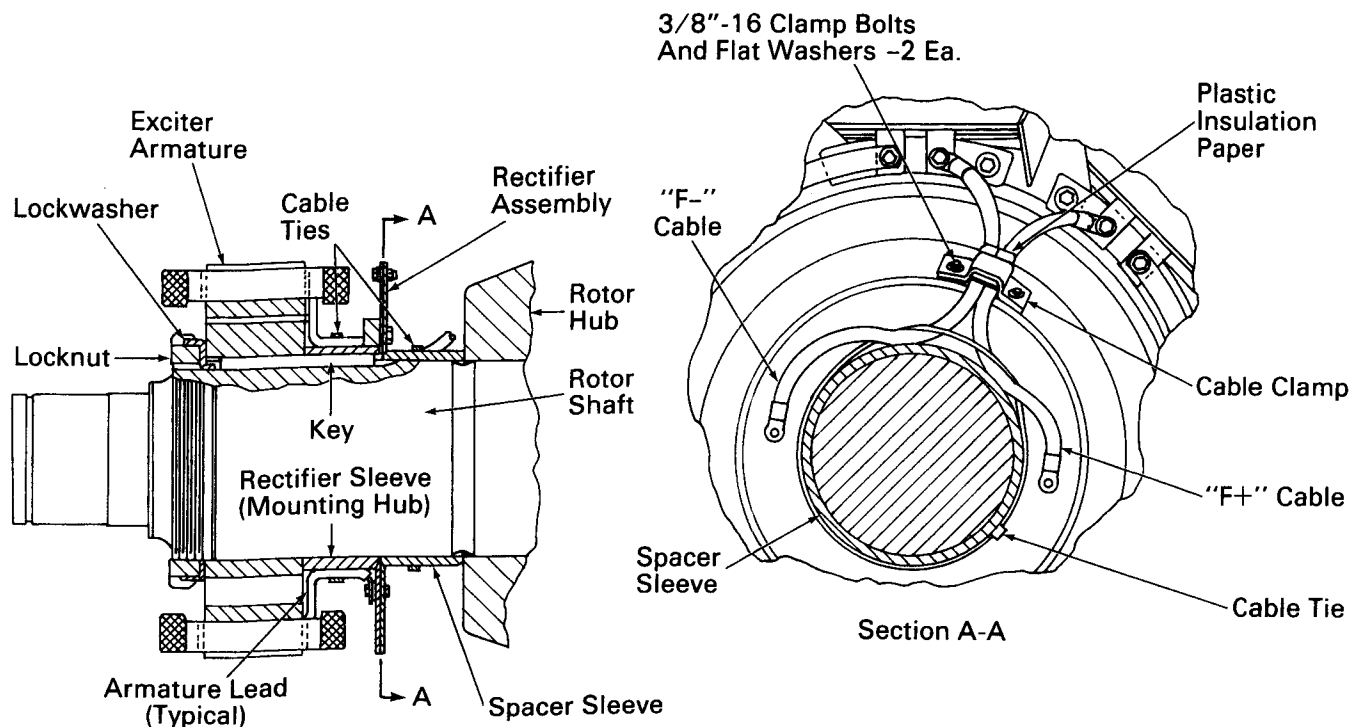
Rotating Rectifier Assembly And Exciter Armature Mounting To Rotor
